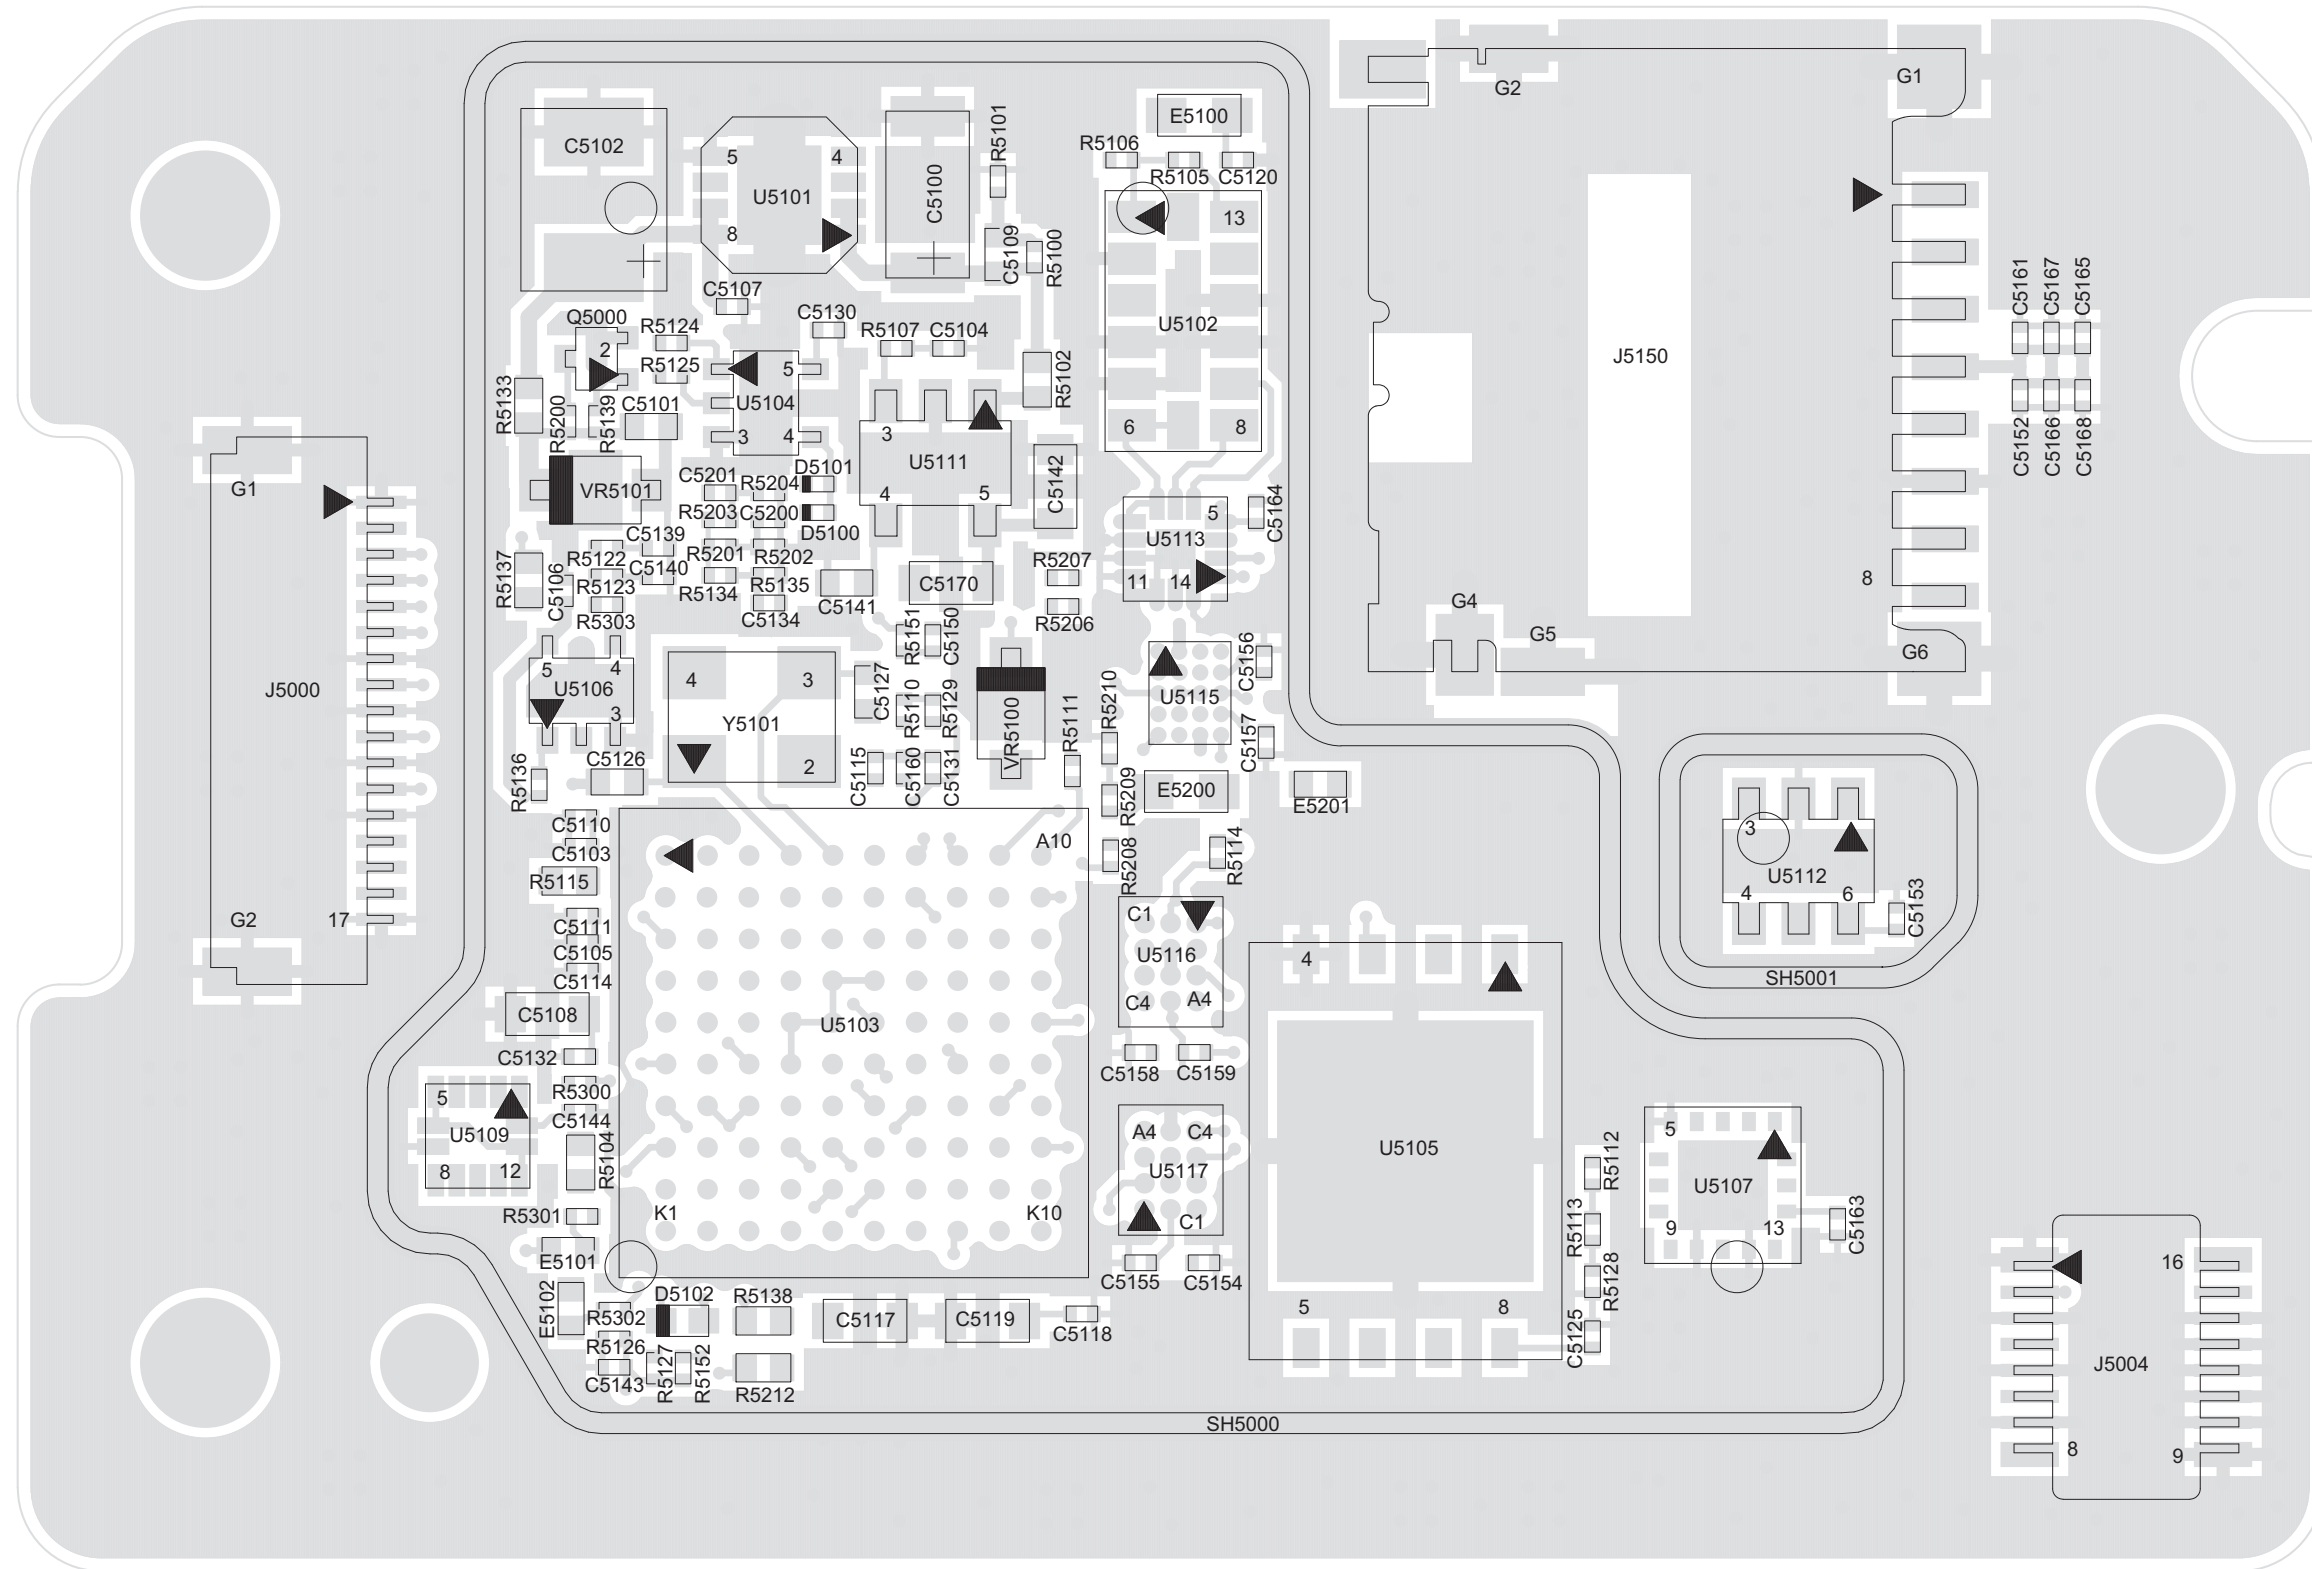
Interface Board Bottom Side PCB No. PC000864A01\_AA
